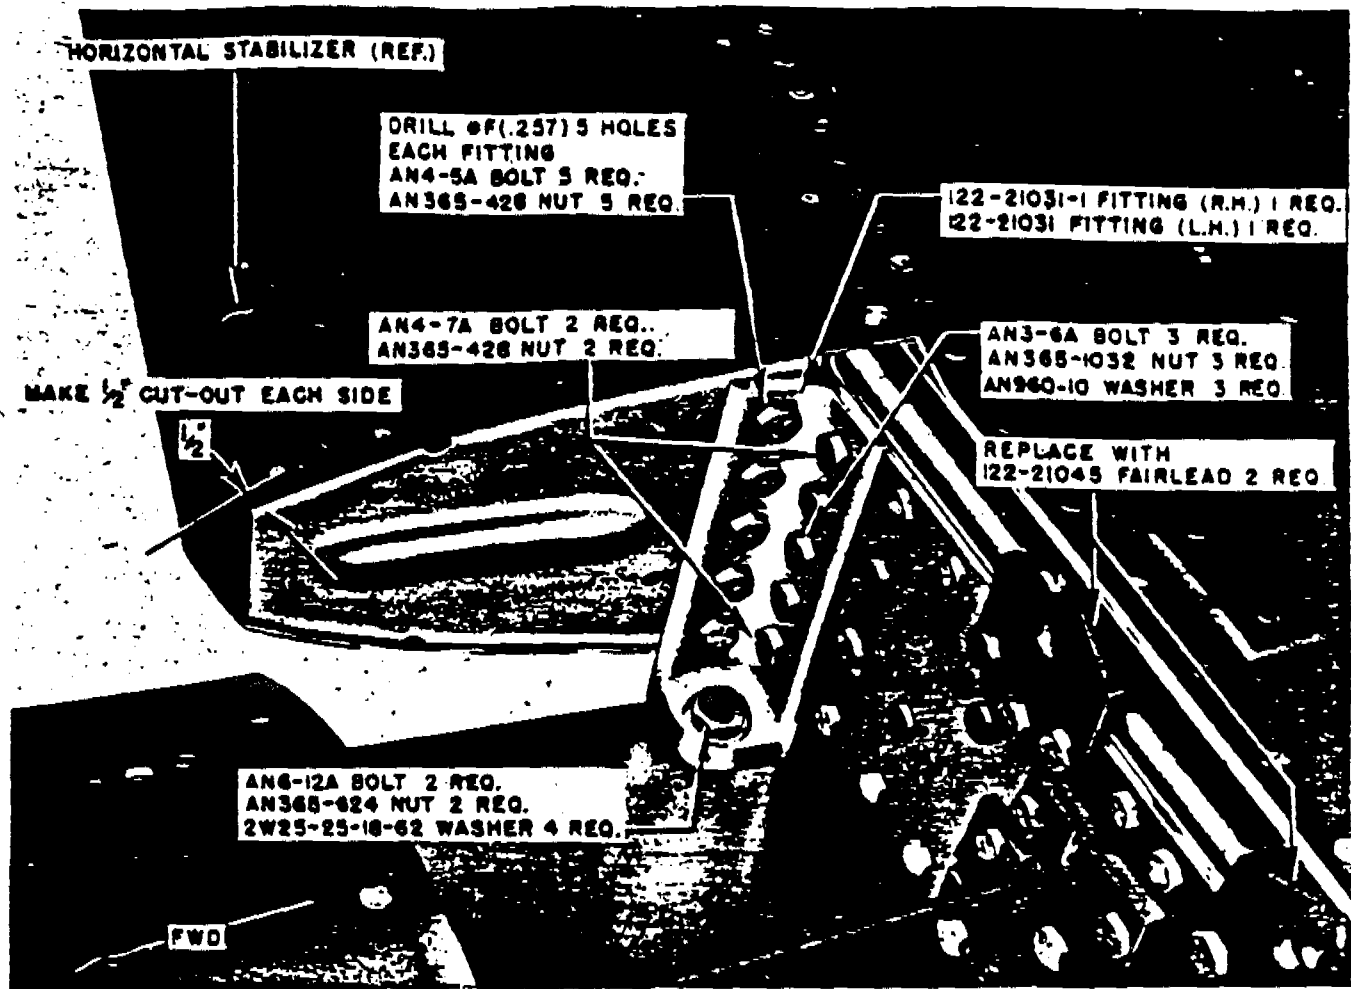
View Showing Front Casting Installed - Horizontal Stabilizer
